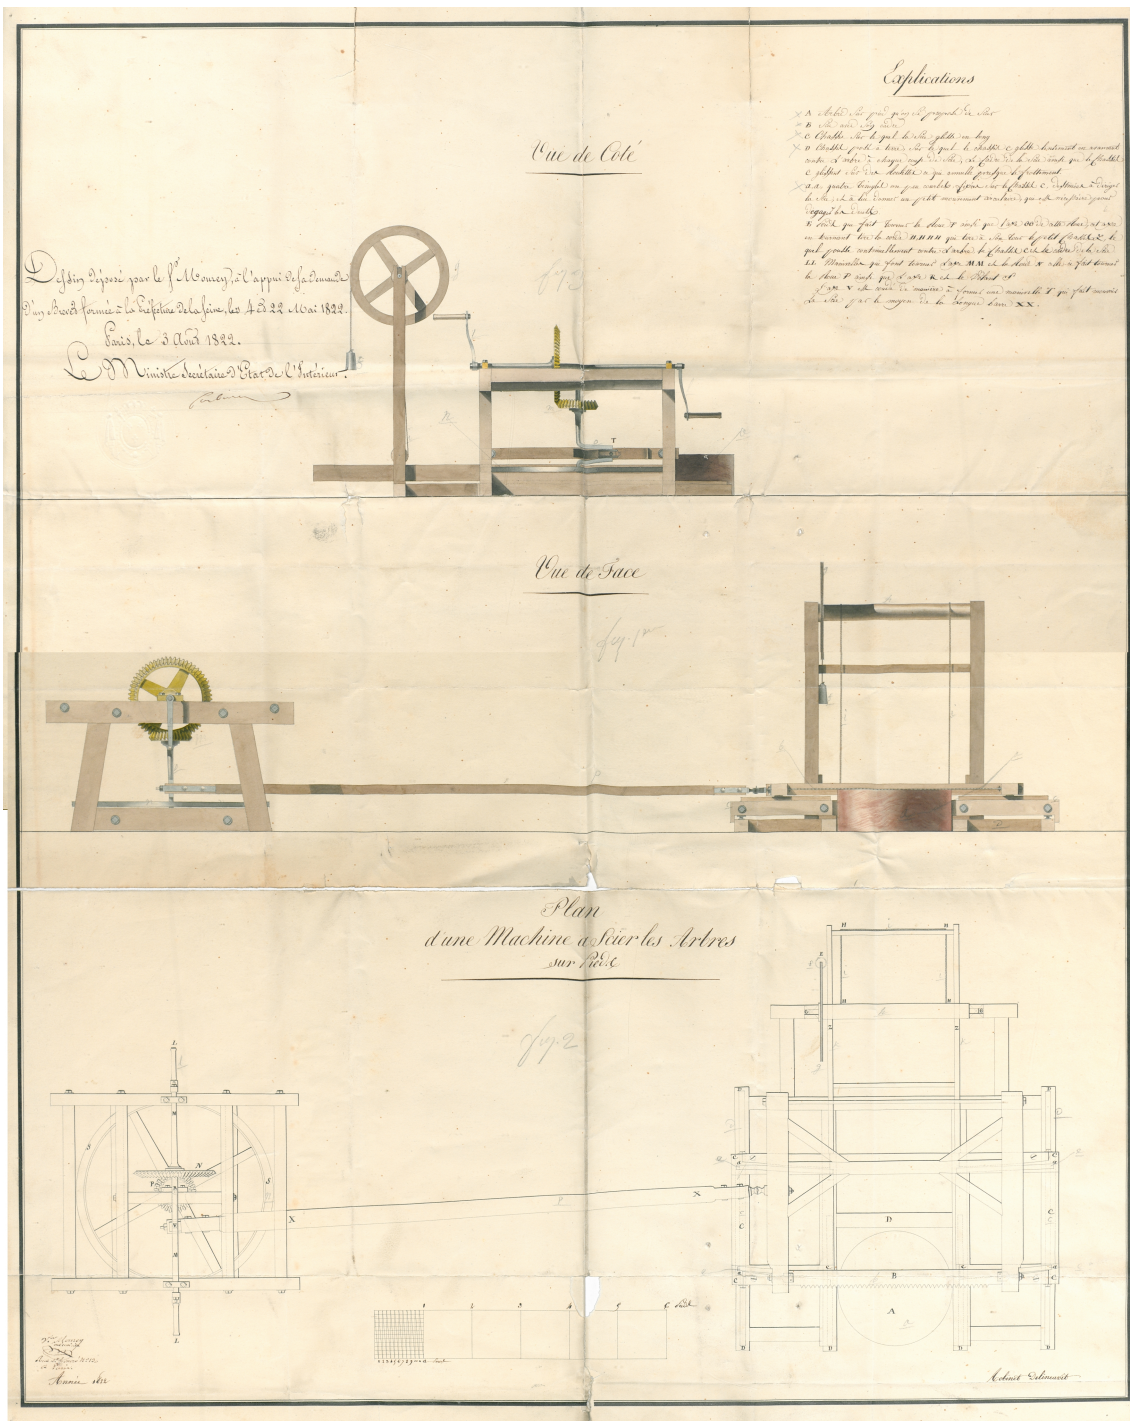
Technical drawings for Mourey's machine to saw standing trees.
